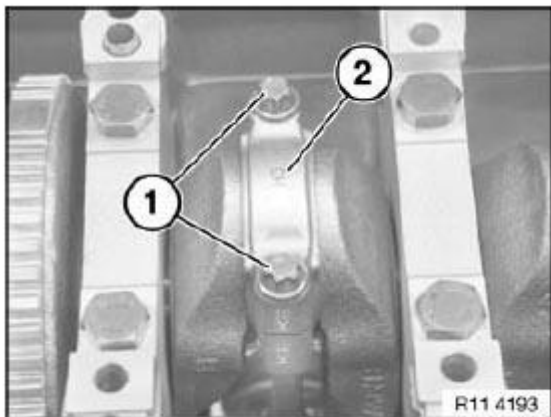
Conrod Bolts And Connecting Rod Bearing Cap
